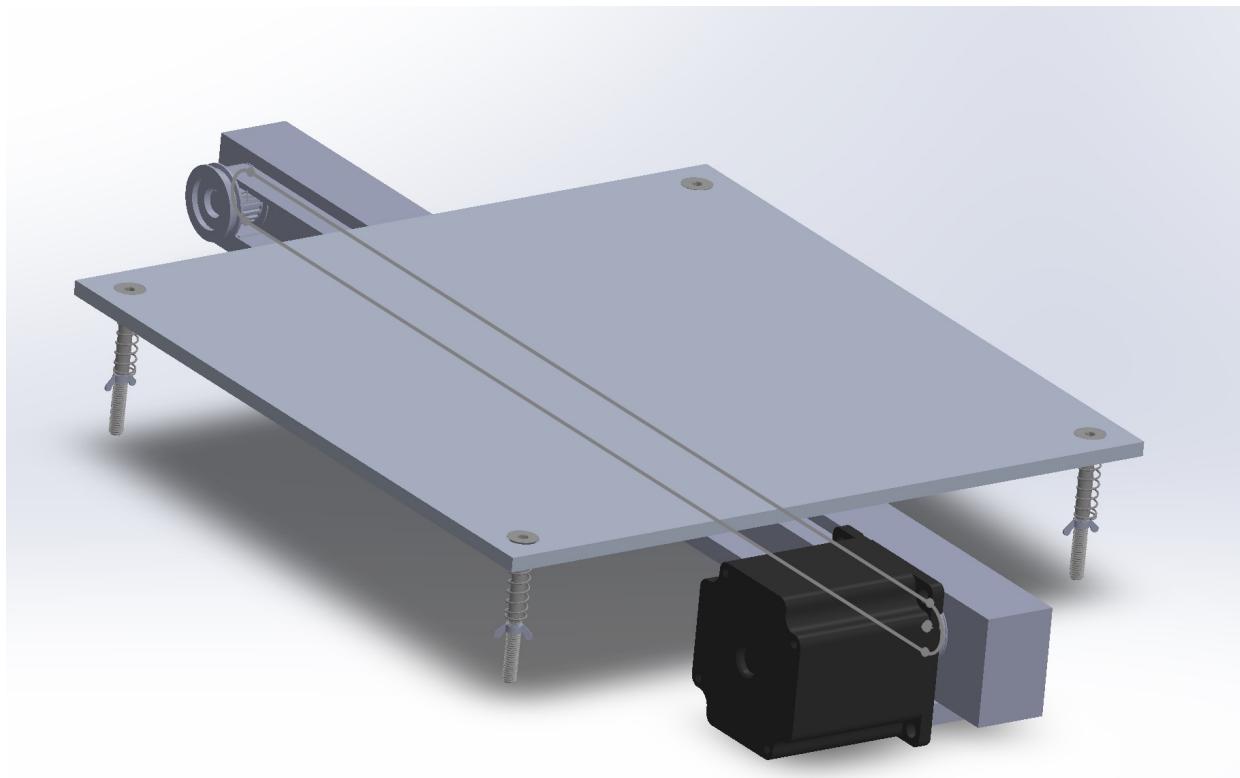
Assembly of the Belt with Stepper Motor, attached on is the Printing bed.
